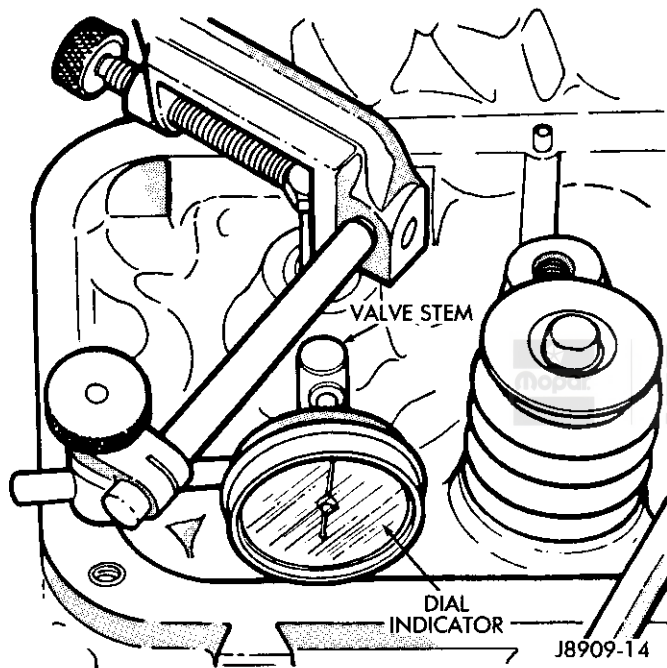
Measurement — Valve Stem-to-Guide Clearance
